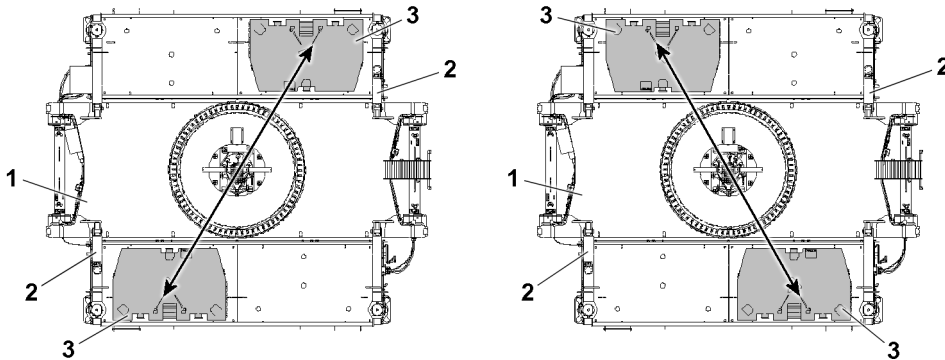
Ballasting the central ballast: Examples for possibilities to place ballast plates diagonally to each other
